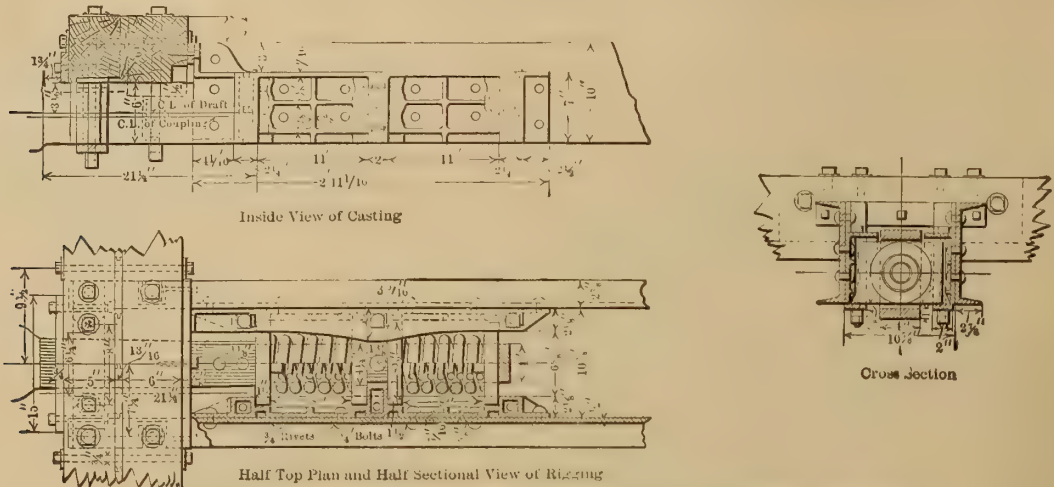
GOULD MALLEABLE IRON DRAFT SILL. GOULD COUPLER CO.
